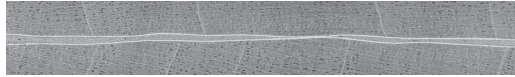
Cross-sectional image of a friction-welded wood sample; the upper and lower surfaces of the seam are marked with a white line.
